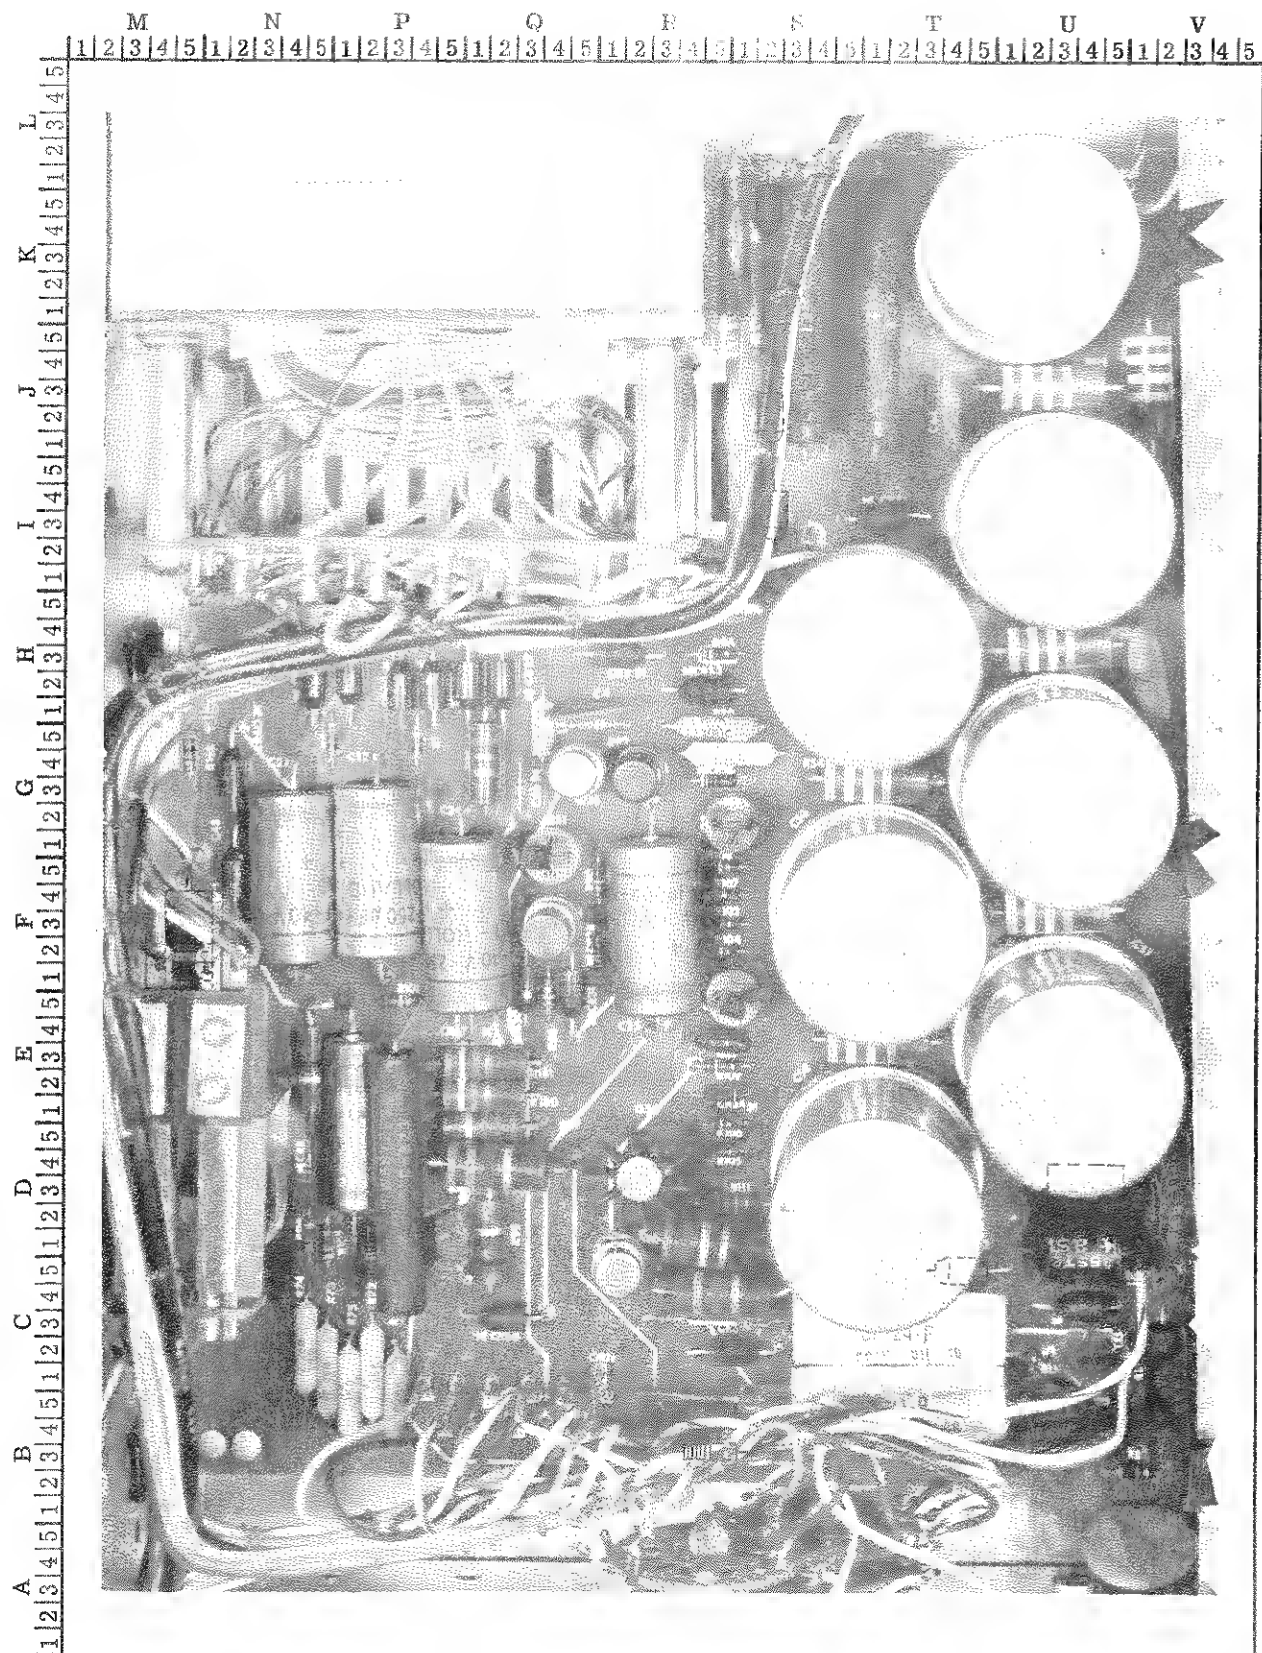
MAIN P/C ASSEMBLY (Left Hand Side)
